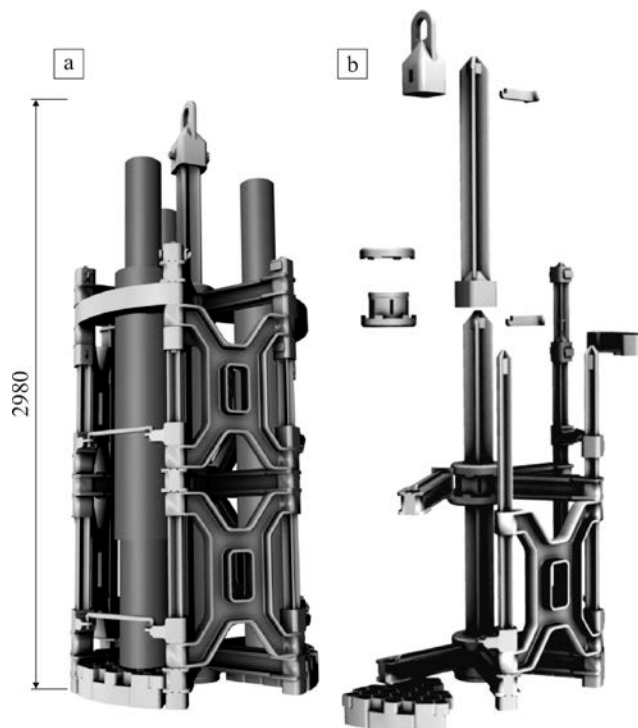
The equipment for the heat treatment of shafts of a wind turbine: a) general view [3, 9], b) single components
